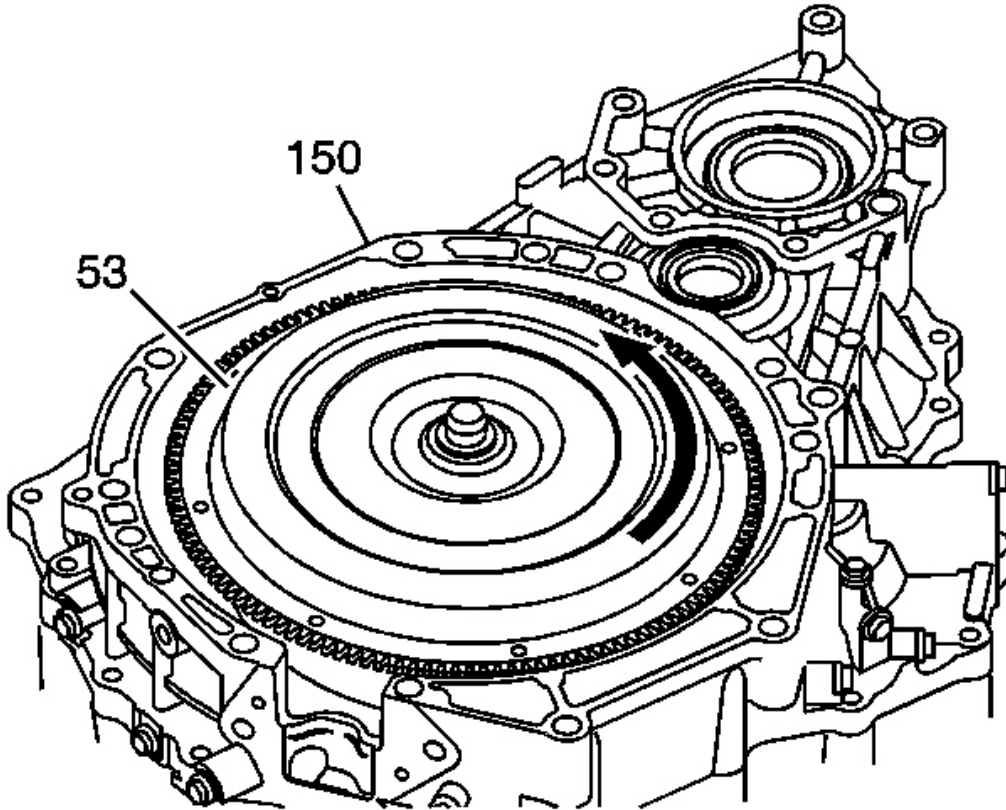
Torque Converter Assembly & Torque Converter Housing
